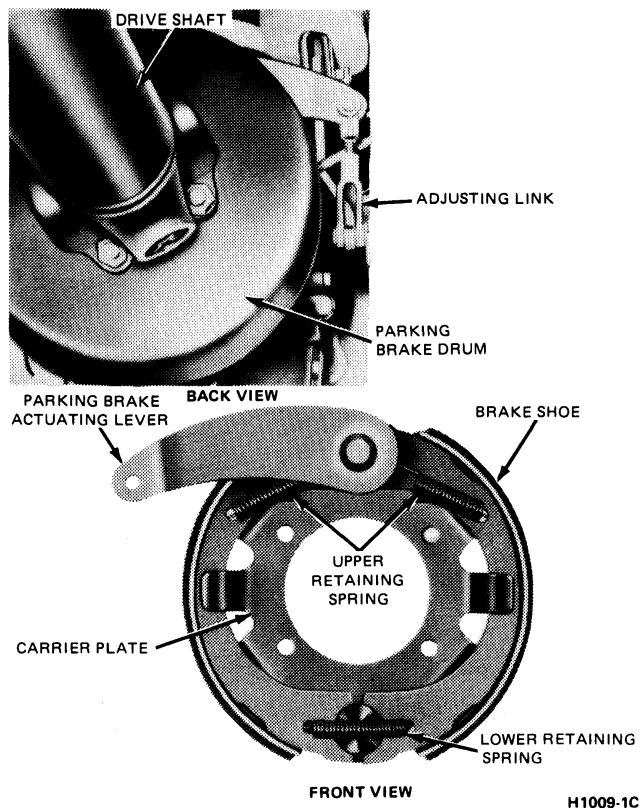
Transmission Mounted Internal Shoe Type Parking Brake—9-10-12 Inch
